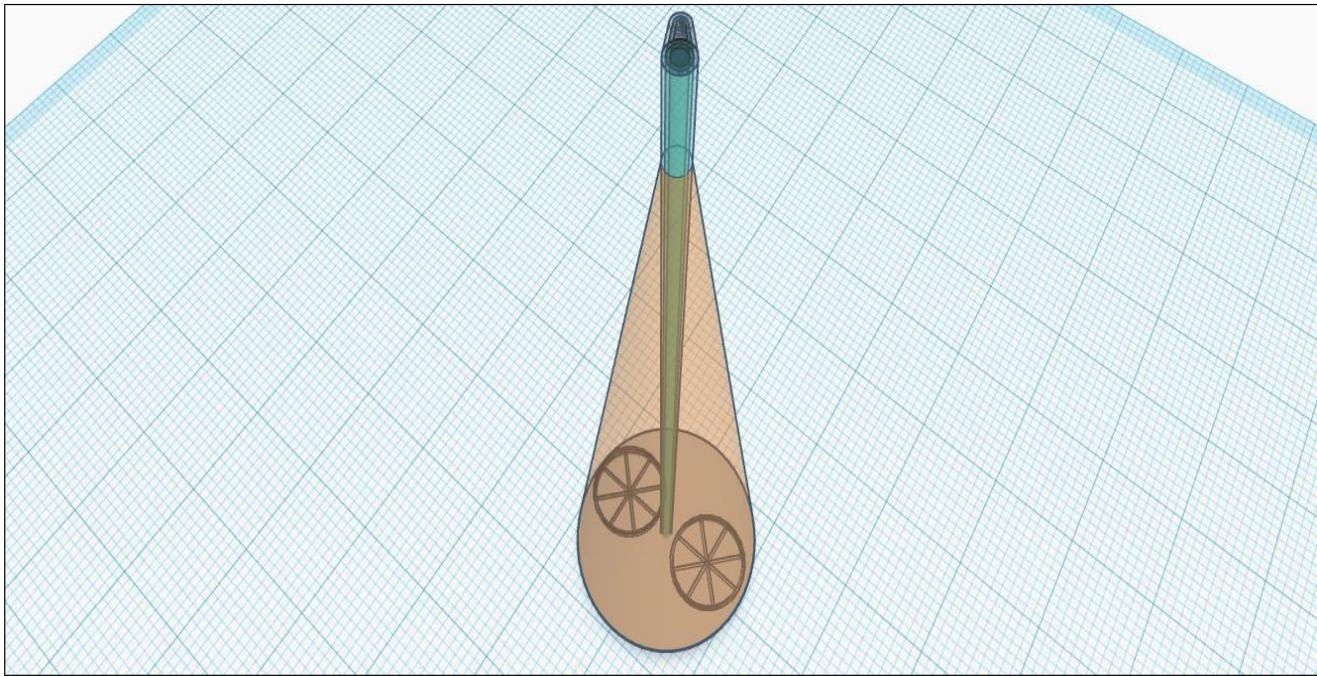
CAD of inner helical nozzle/coil system, surrounded by cone coil.
